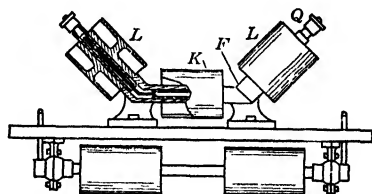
Robins' Three-pulley Idler, 1896.
